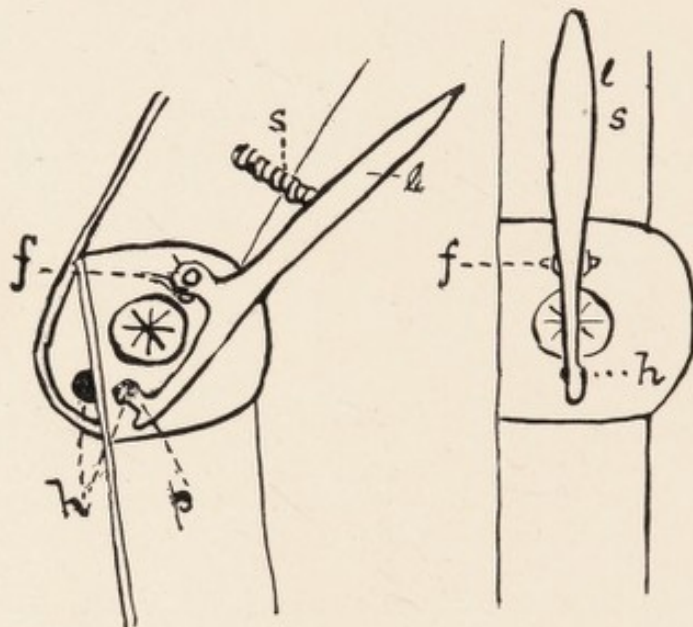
Automatic knee spring lock-joint. Not released until lever is pressed. *s* = spring. *l* = lever. *f* = fulcrum joint. *p* = pin. *h* = hole in plate. When extended pin drops automatically in hole.
